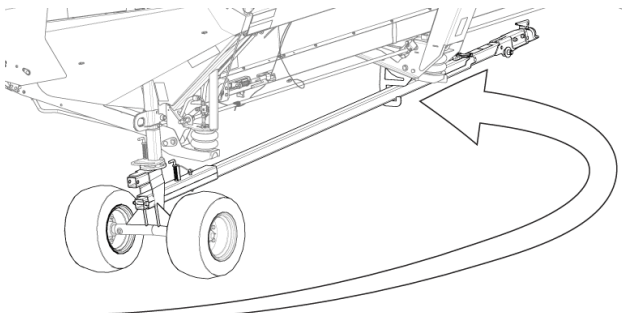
Swing Draw Bar into Storage Position on Holder.
